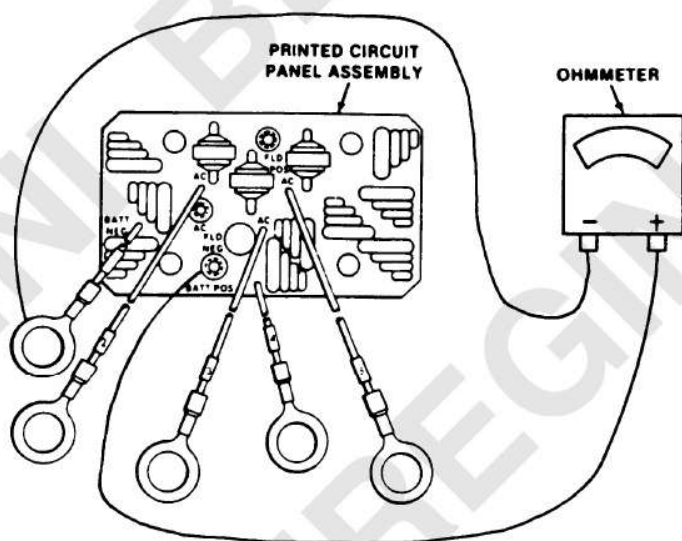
Shorted Printed Circuit Panel Assembly Capacitor Check.
